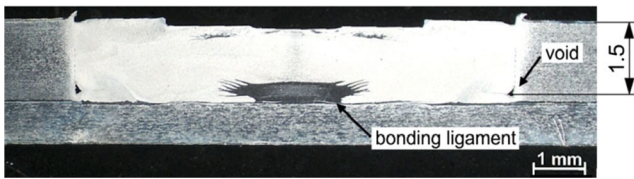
Cross-sections of RFSSW joints welded at $n = 2400$ rpm; $g = 1.5$ mm; $t = 1.5$ s
